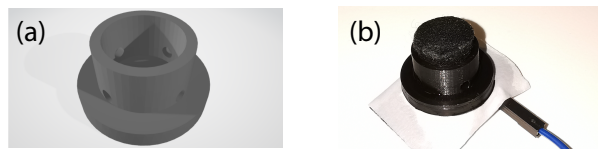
(a)3D printed electrodes Holder, (b)3D printed electrodes.
